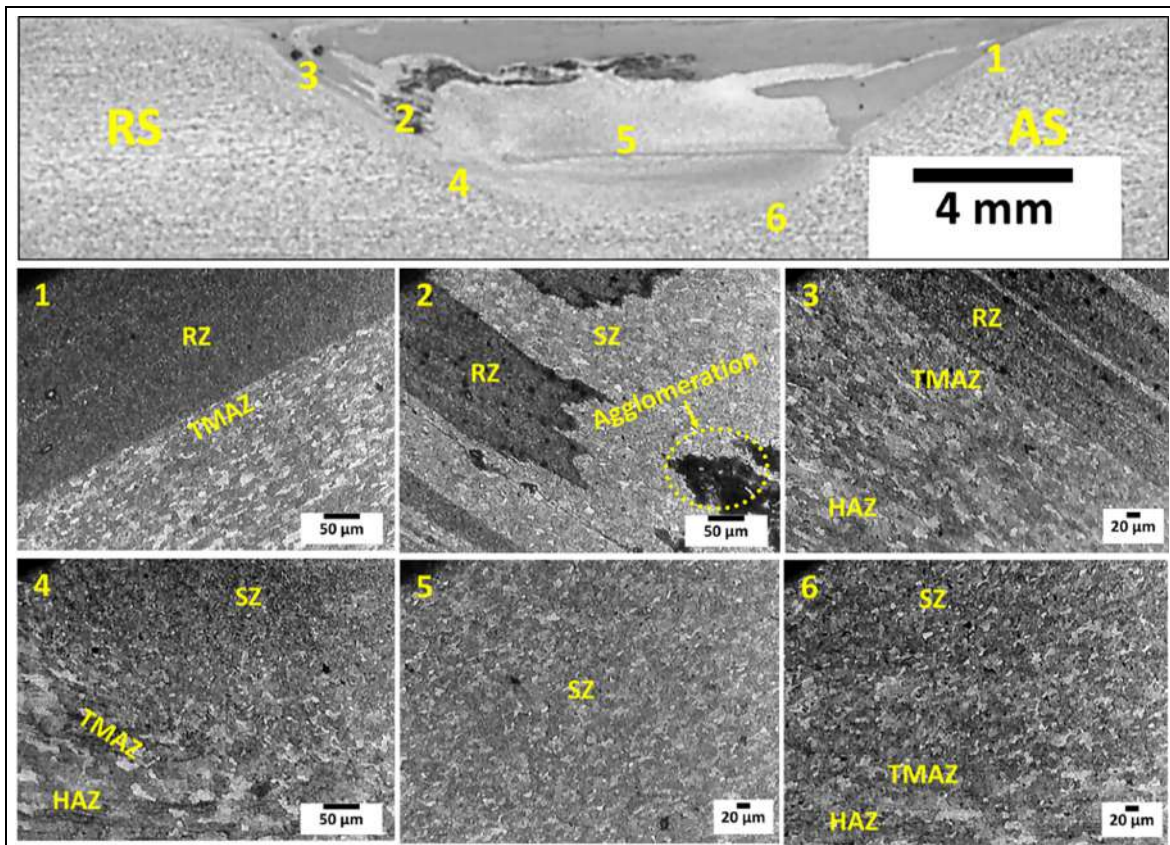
Macroscopic image of sample DP9, and several locations of welding zone.
